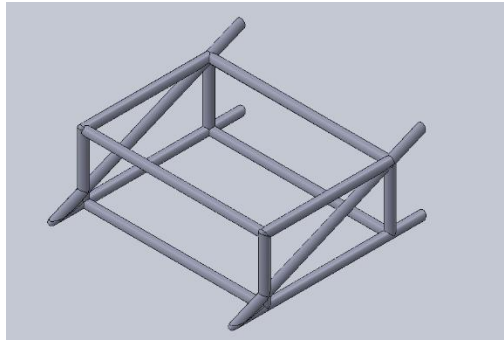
Option one, a trapezoidal design with cross bracing and a support bar to connect the frame to the rear subframe.
